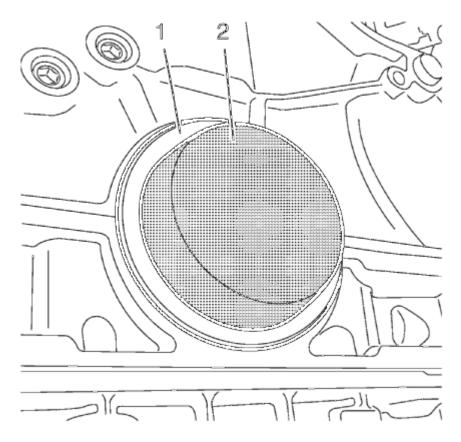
Installing Crankshaft Front Oil Seal Courtesy of GENERAL MOTORS COMPANY
